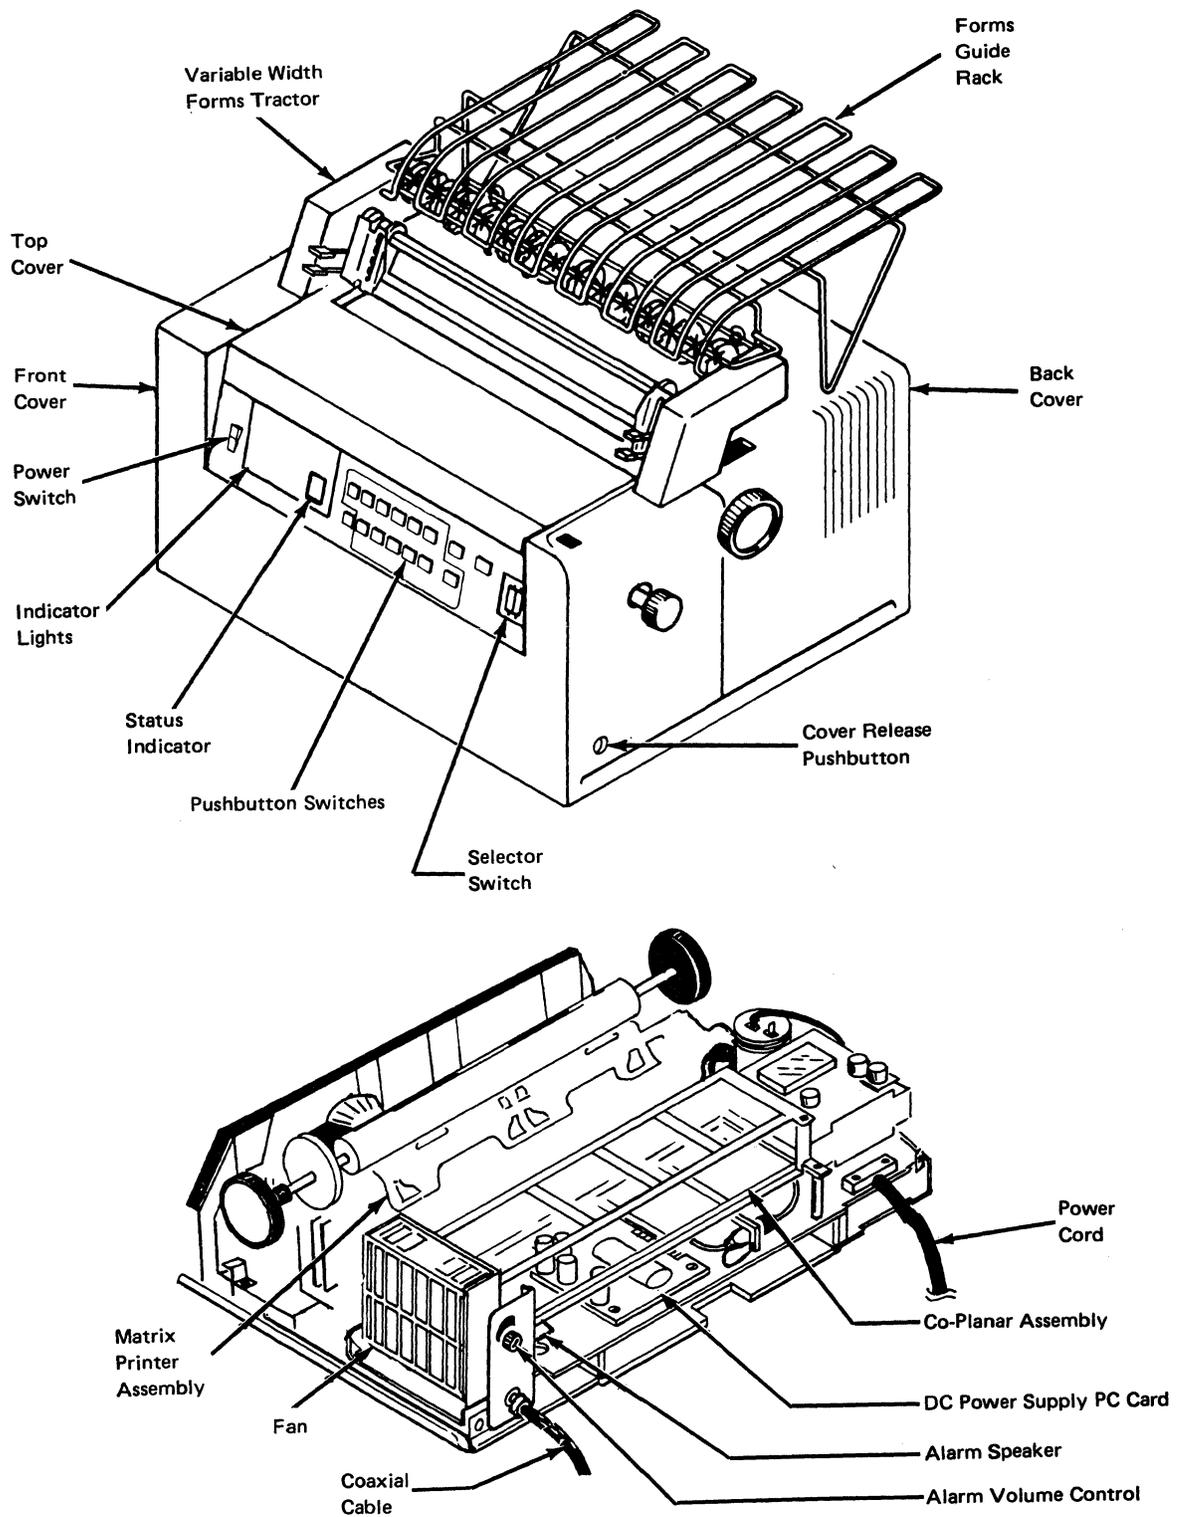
General View of the 3287 Printer, With and Without Cover
